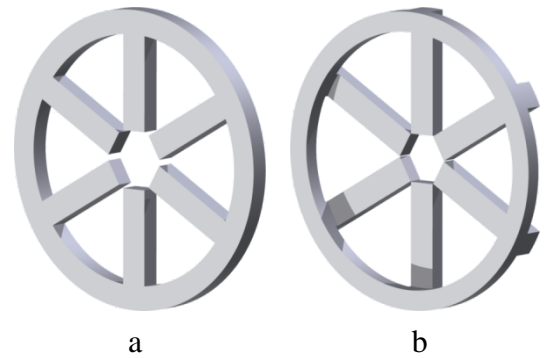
Layout of the sheet rotor (a) and the sheet stator (b)
